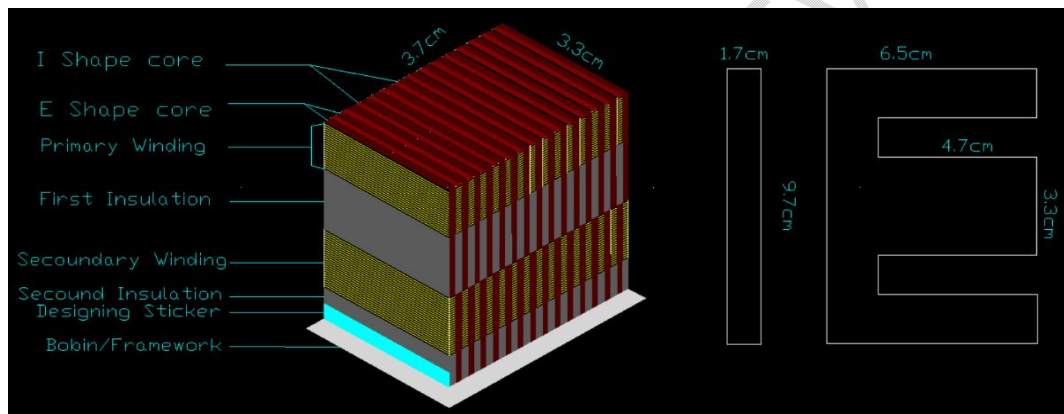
A 3-D view and 2-D view of the transformer's core design in AutoCAD
